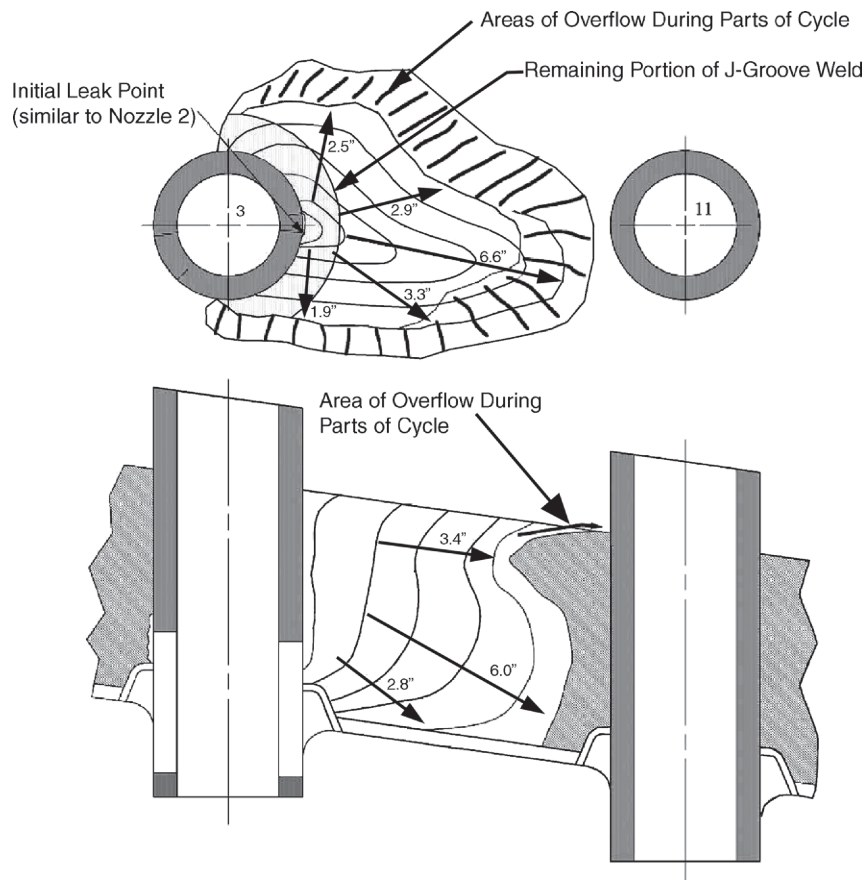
PLAN AND CROSS-SECTION THROUGH CORRODED PART OF DAVIS-BESSE REACTOR VESSEL HEAD
